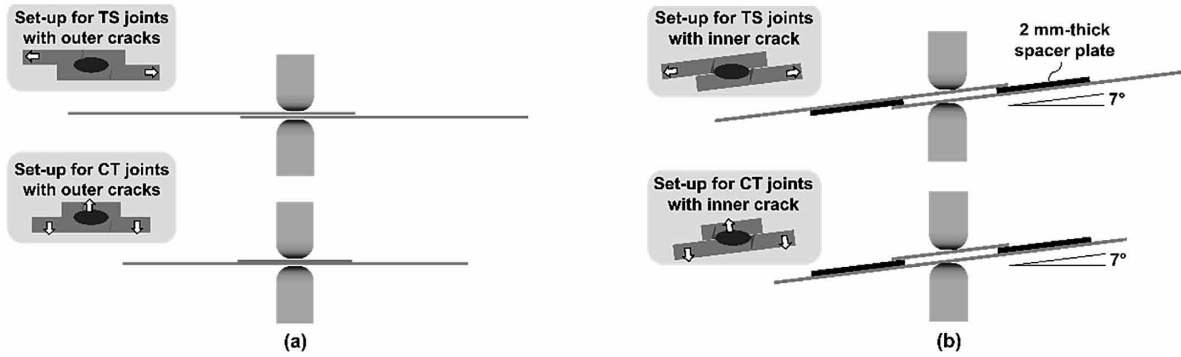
Schematic illustration of set-up for producing welds with LME (a) outer, (b) inner cracks
